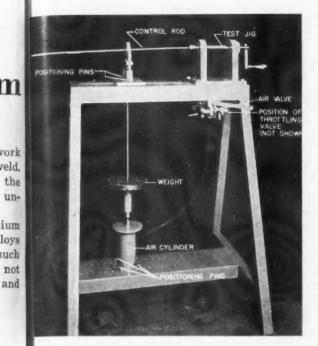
Proof-loader for \%-in. flashwelded control rods.
